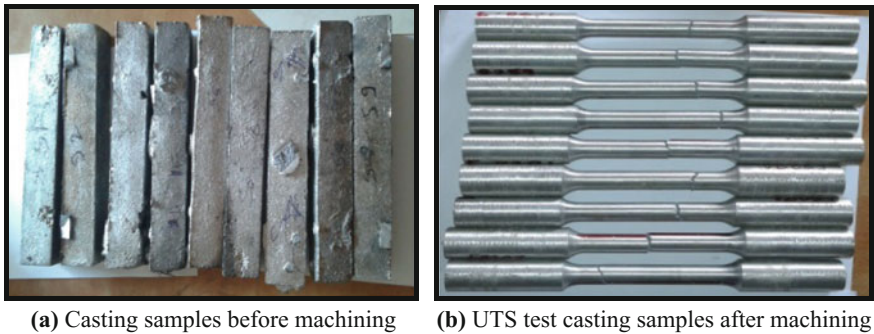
a Casting samples before machining. b UTS test casting samples after machining
